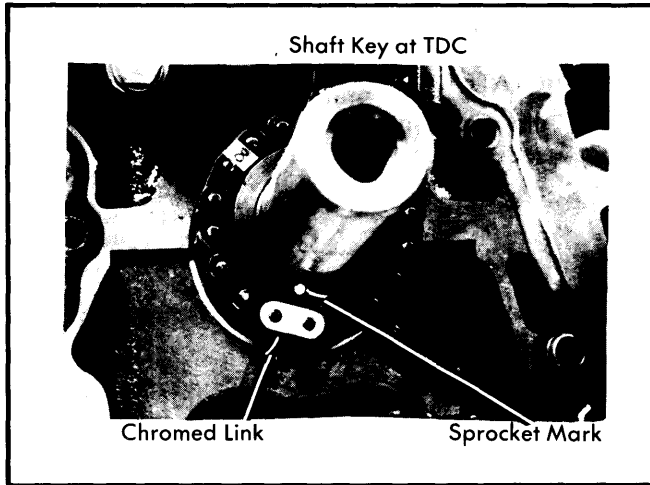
Aligning Crankshaft Sprocket and Timing Chain
